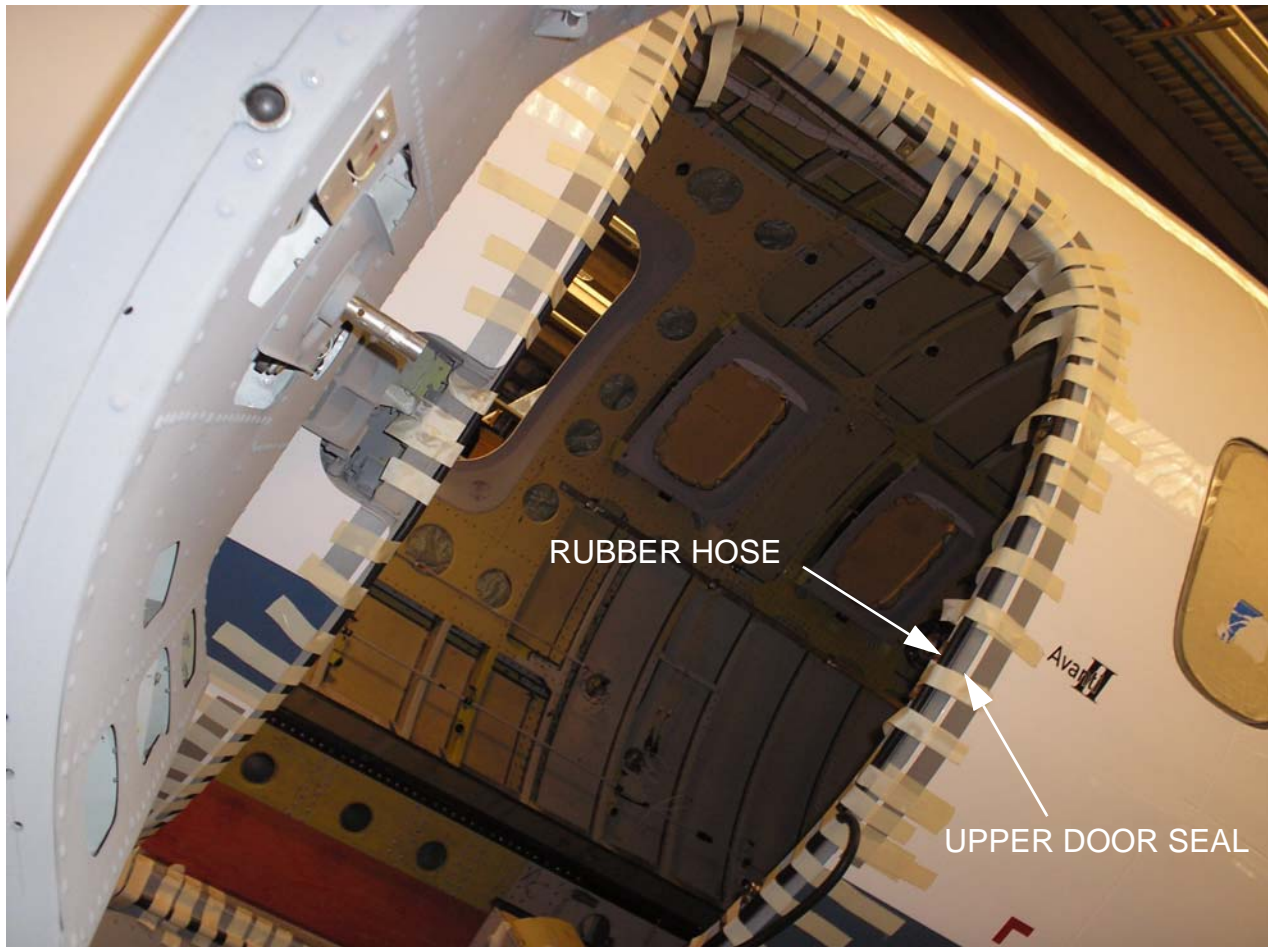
Upper Cabin Door Seal - Installation (Sheet 6 of 6)
